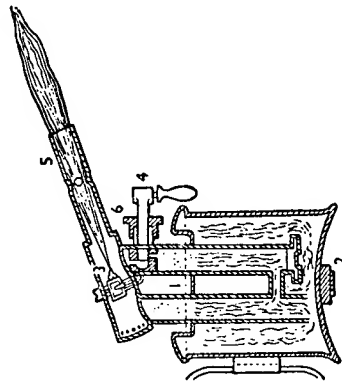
Section through a soldering blowtorch for use with aluminum. 1, basin; 2, adjuster; 3, burner nipple; 4, regulator; 5, tube; 6, square for screwing up screw of regulator.
